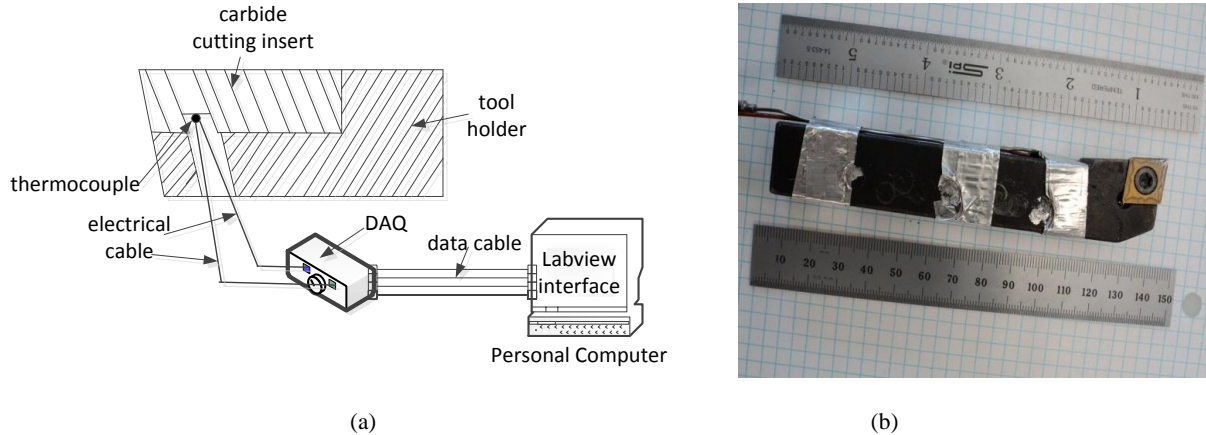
Embedded thermocouple technique for temperature measuring, (a) schematic and (b) cutting insert cutting tool with thermocouple
